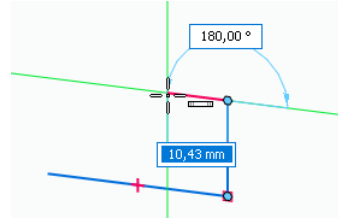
Horizontal relationship handle displayed while drawing a horizontal line
